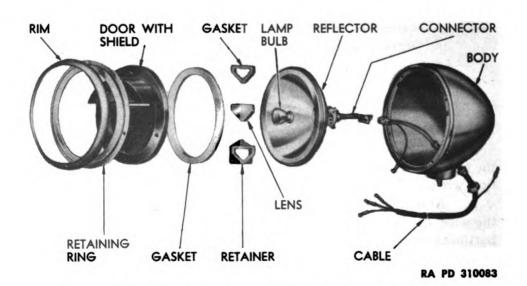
Blackout Driving Light Disassembled (Type Formerly Used on Export Vehicles)
